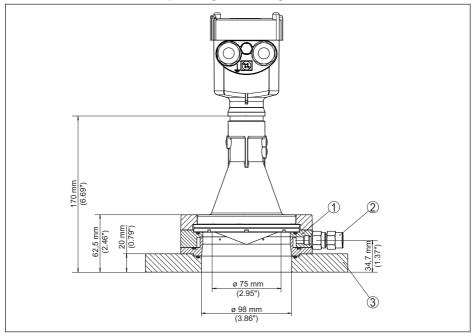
VEGAPULS 67, adapter flange and air rinsing
